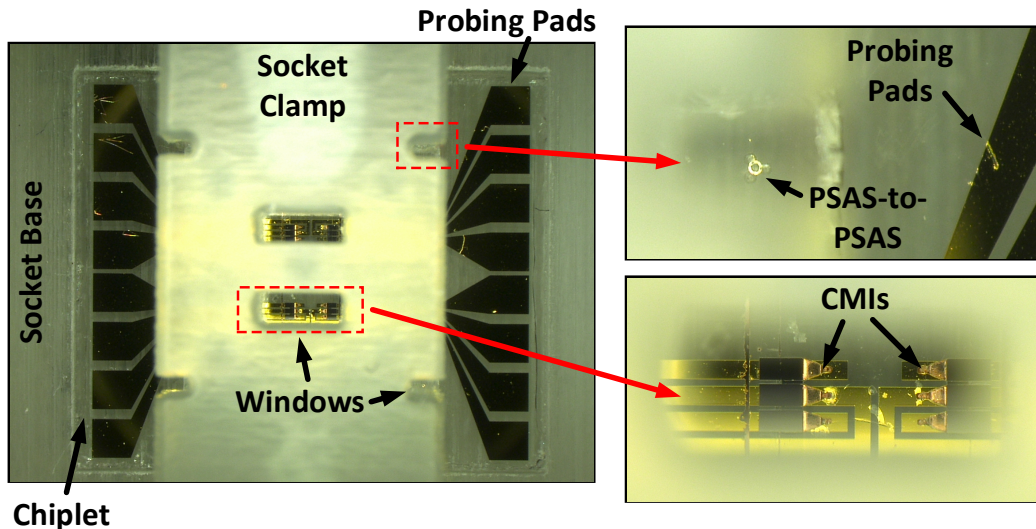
Optical image of the PINCH-system after full assembly has been performed. Windows within the socket clamp are used to visually observe both PSAS-to-PSAS, and CMIs and their respective mating pads to ensure that alignment is accurate and CMI contact is formed throughout the measurement process.
